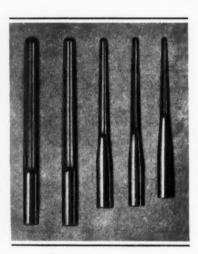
Mill-cut Rotary Files for Cleaning out Deep Recesses
